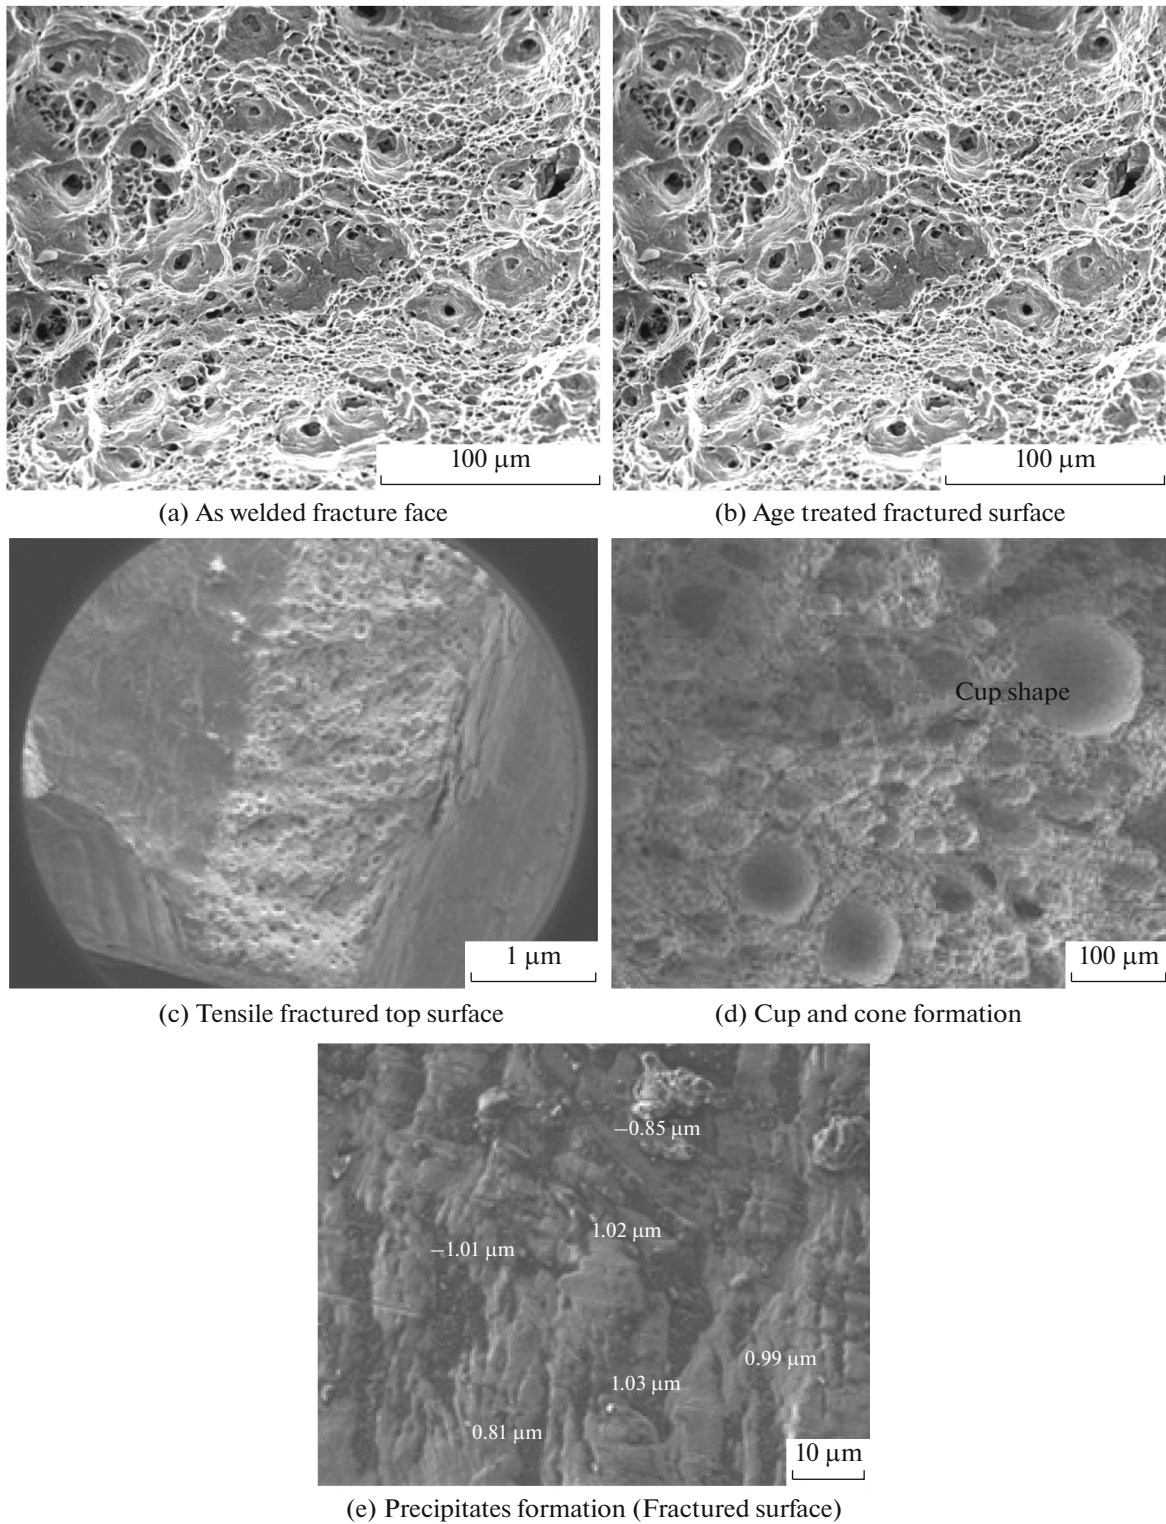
SEM fractographs of as weld and age treated tensile fractured samples.
